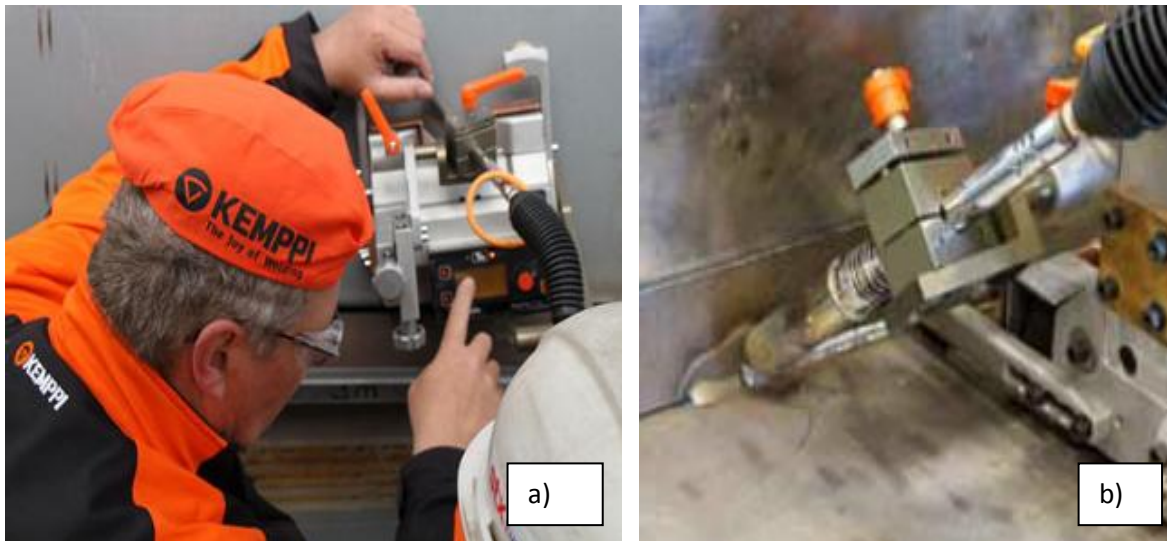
A. Mechanized welding equipment - “welding with equipment that requires manual adjustment of the equipment controls in response to visual observation of the welding, with a torch, gun, or electrode holder held by a mechanical device” (Noruk et. al, 2001). Photograph: (courtesy of Kemppi Oy: Kemppi MagTrac F 61 Mechanized MIG/MAG welding)
